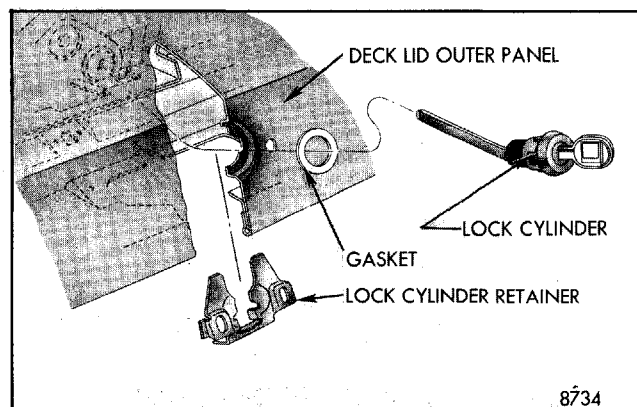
Lock Cylinder and Retainer Cadillac "K-69" Style
